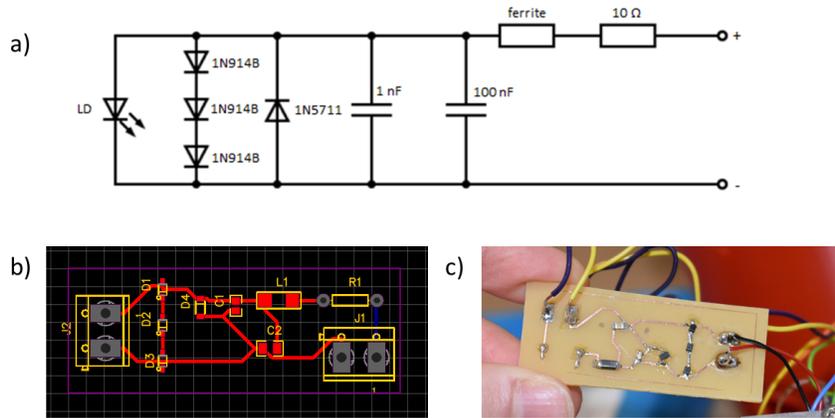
Laser diode protection circuit: a) electronic schematics with specified parts, b) EasyEDA PCB project, c) assembled circuit.
